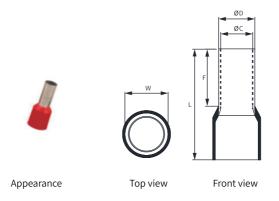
Appearance and dimensions of the tube pre-insulated lug (TG-JT type)
